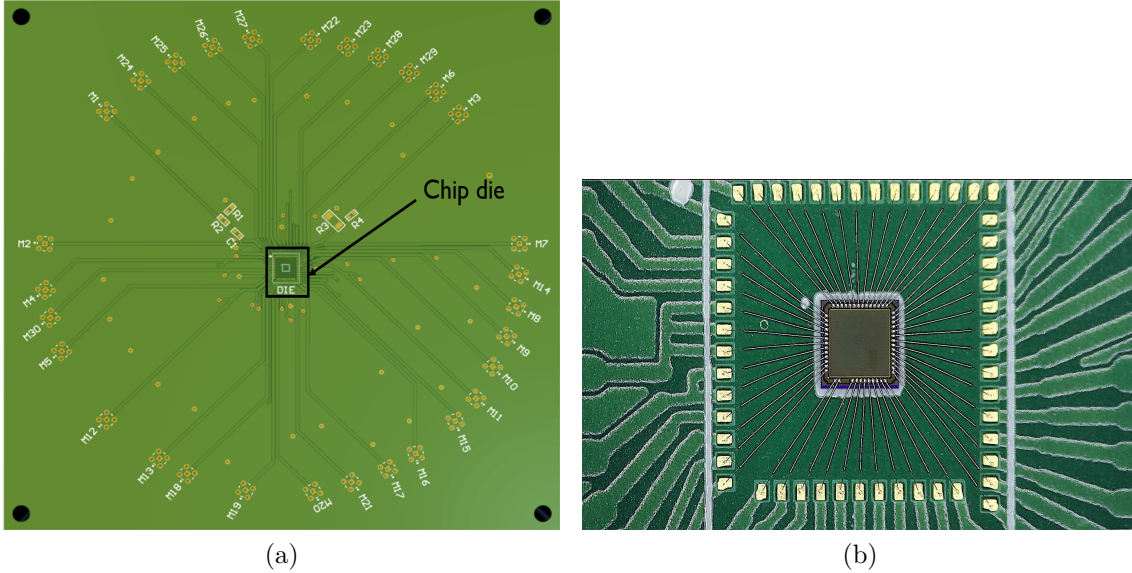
(a) $13\ \text{cm} \times 13\ \text{cm}$ 4-layer FR-4 PCB conducted immunity variant (COB) bottom side. (b) Microscopic picture of bonding wires connecting the die pads to the PCB bond pads.
